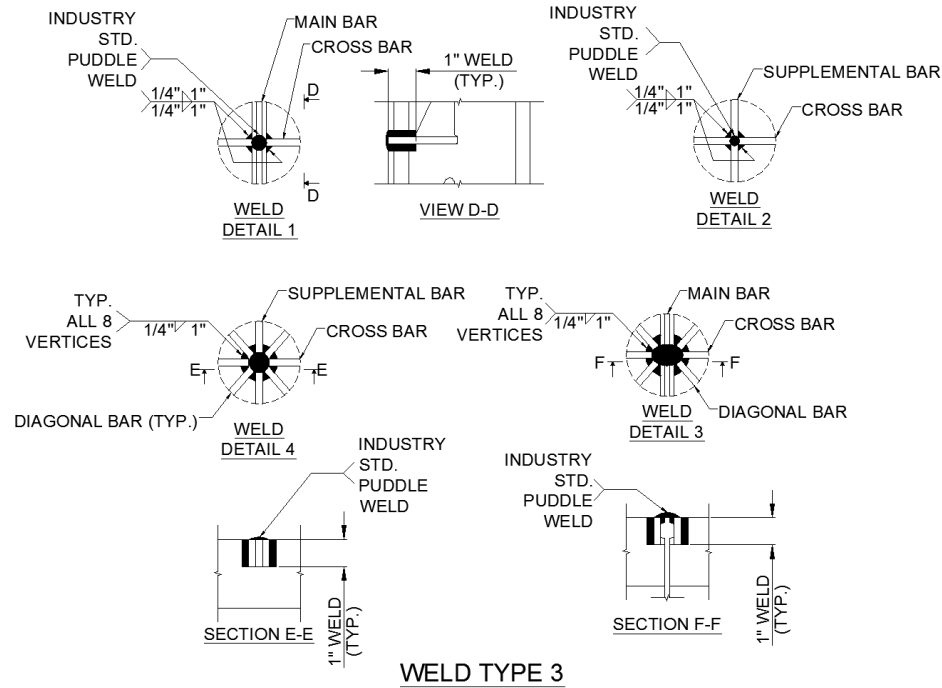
Type 3 weld detail (original detail provided by the BGFMA)
